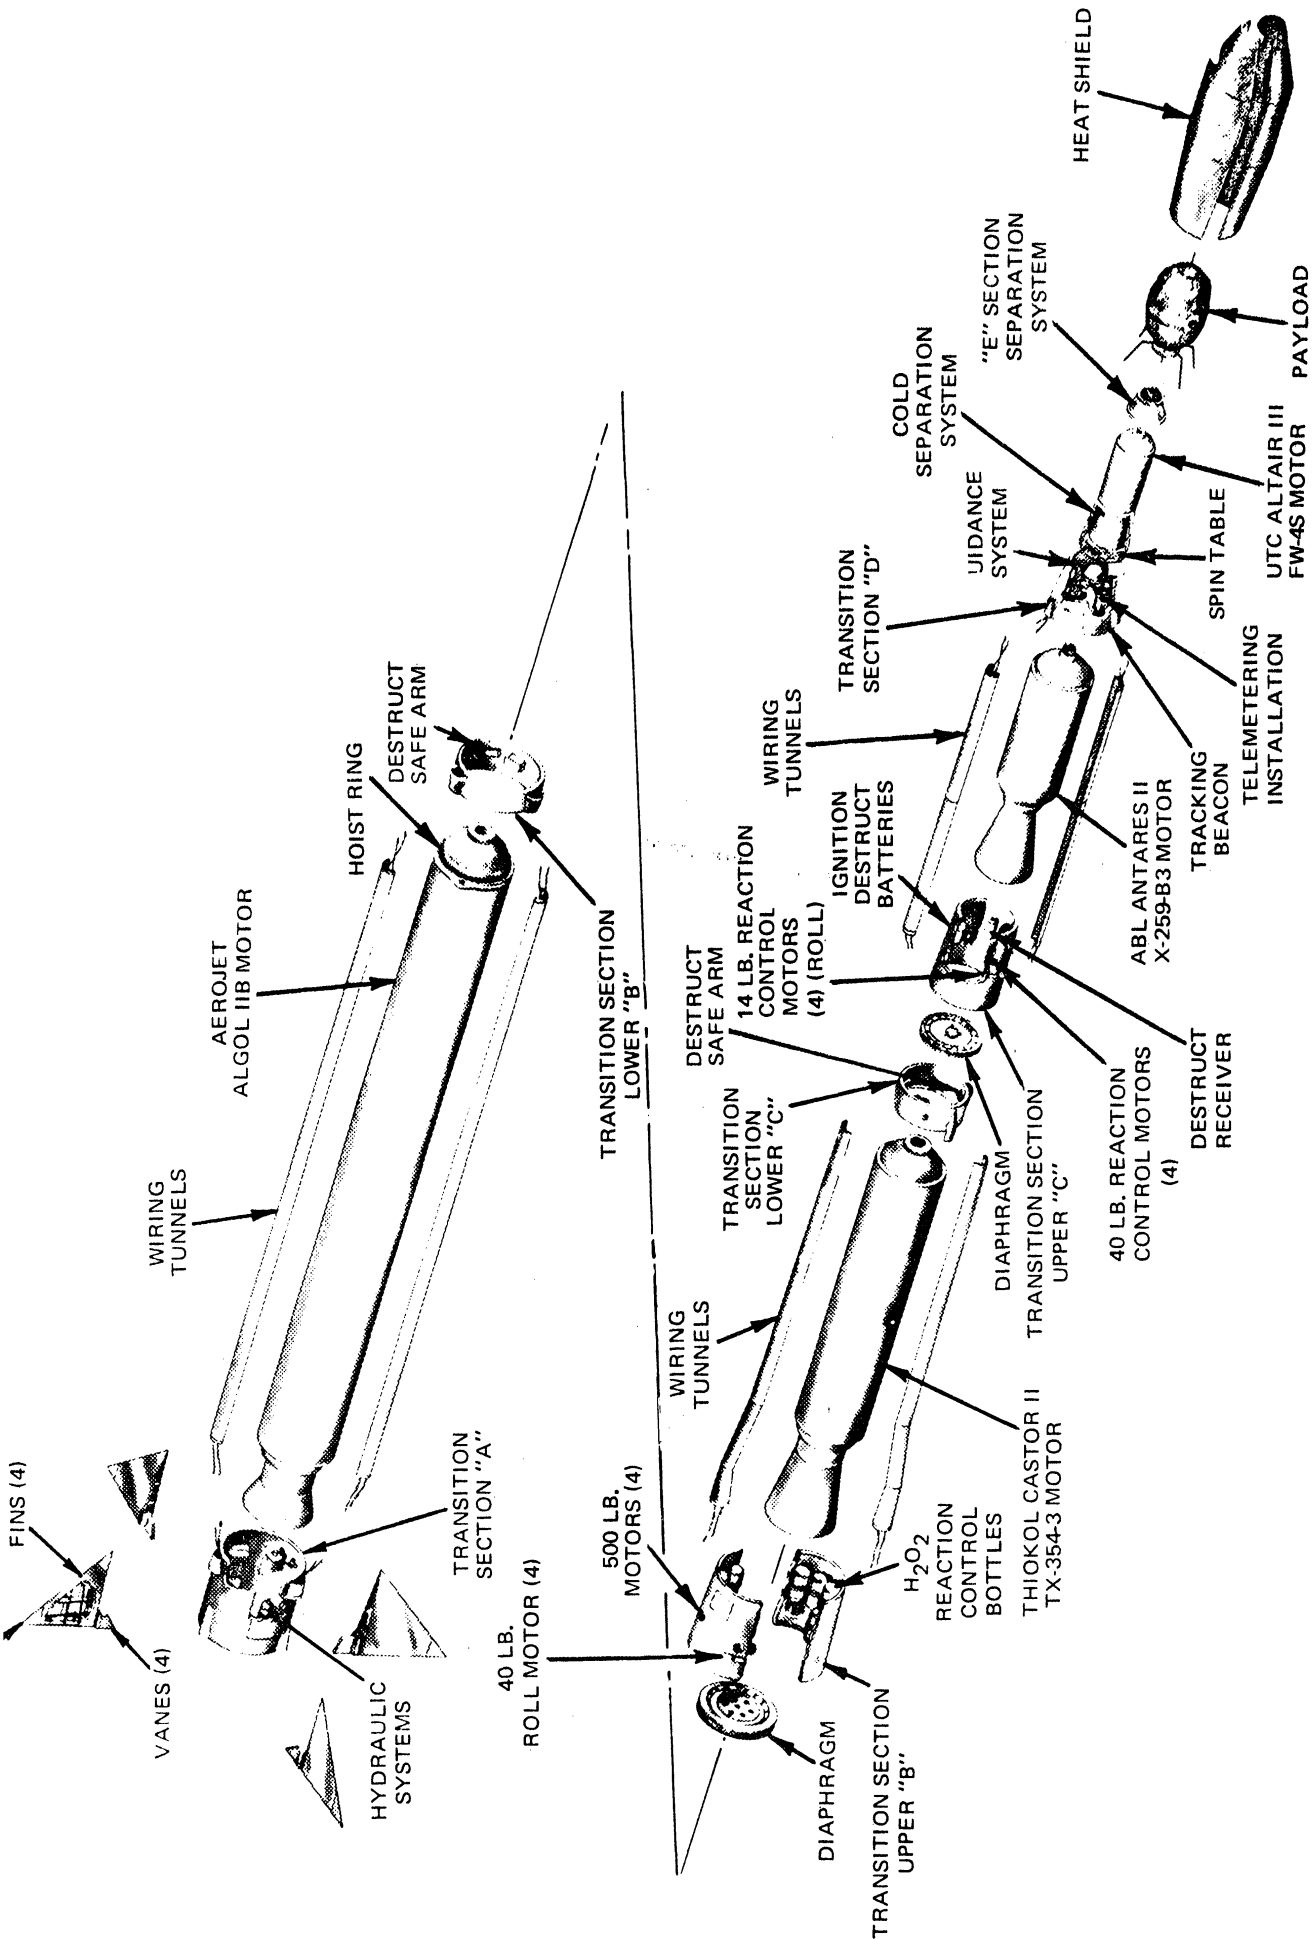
Exploded View of LTV's Scout Launch Vehicle
